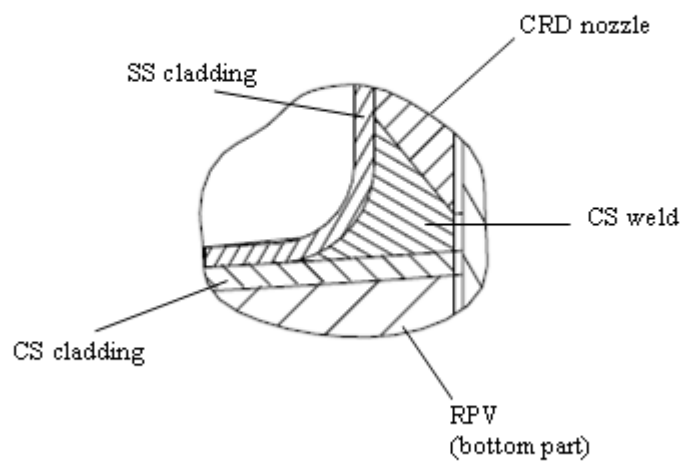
Details of the weld between the CRD nozzle & bottom part of RPV.
